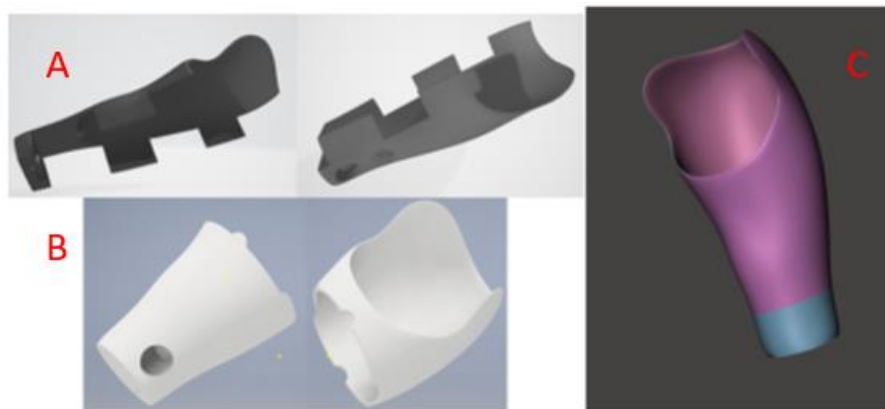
Different modeling methods before printing a transradial socket. (a) socket divided vertically (B) socket divided horizontally (C) One-piece socket (no division) [2].
